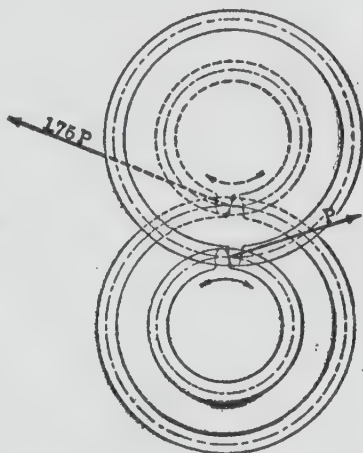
TOOTH PRESSURES IN ALL-SPUR TYPE OF PLANETARY.
